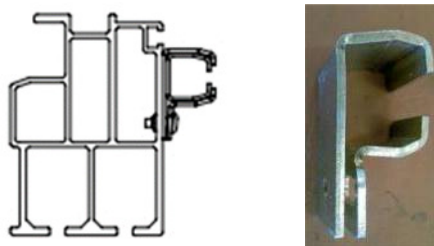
Wall mounting brackets and a wider joint bracket over the track joint.
